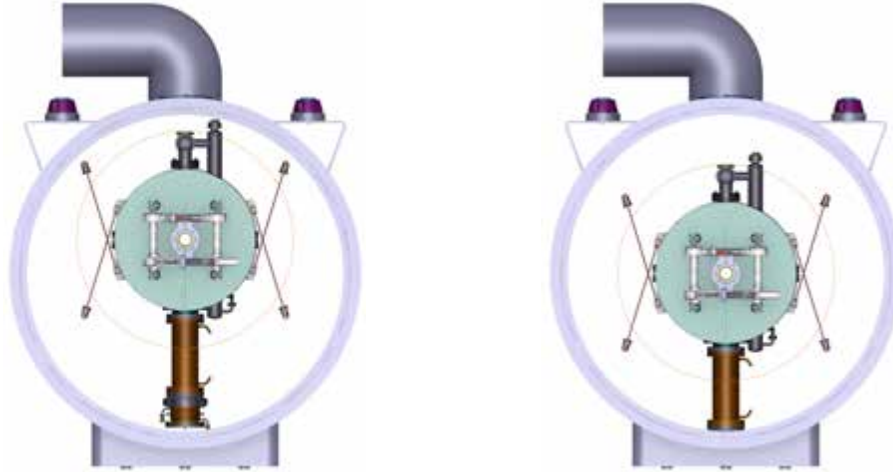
Assembling the spoke cavity and power coupler in the cryostat. The diameter of the cryostat accommodates the height of the cavity and power coupler assembly, permitting the insertion of the cavity string into the vacuum vessel. Left: String of cavities during the cryostatting. Right: String of cavities at nominal position.
